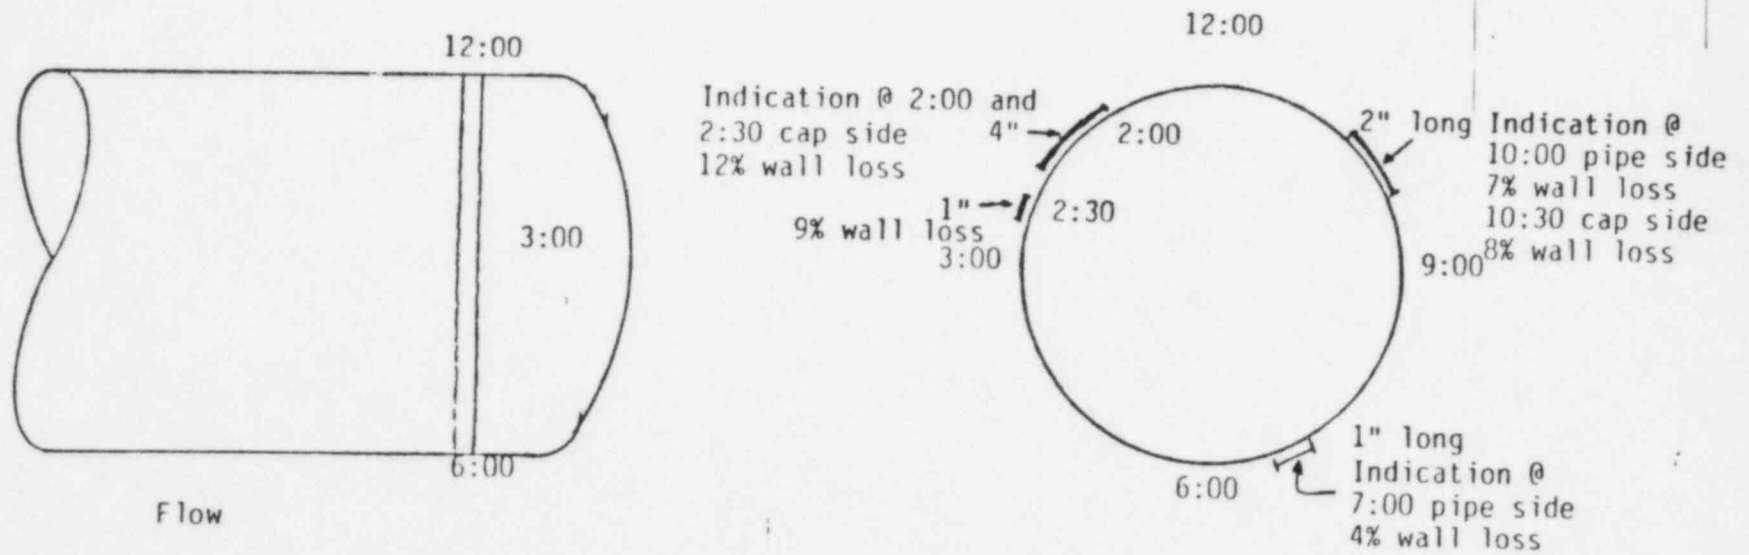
Flaw Indications in Weld KR-2-37
